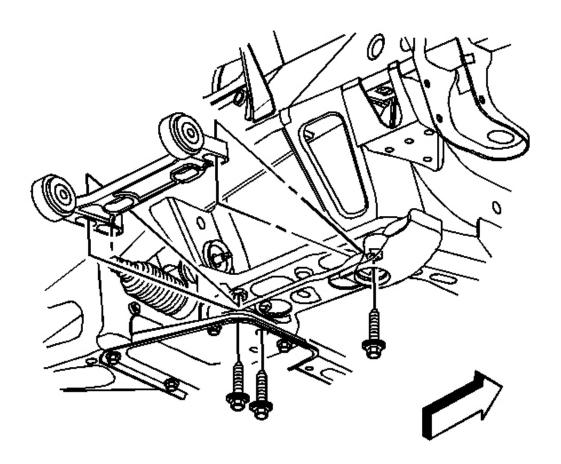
Removing/Installing Lower Control Arm Bracket Courtesy of GENERAL MOTORS CORP.
